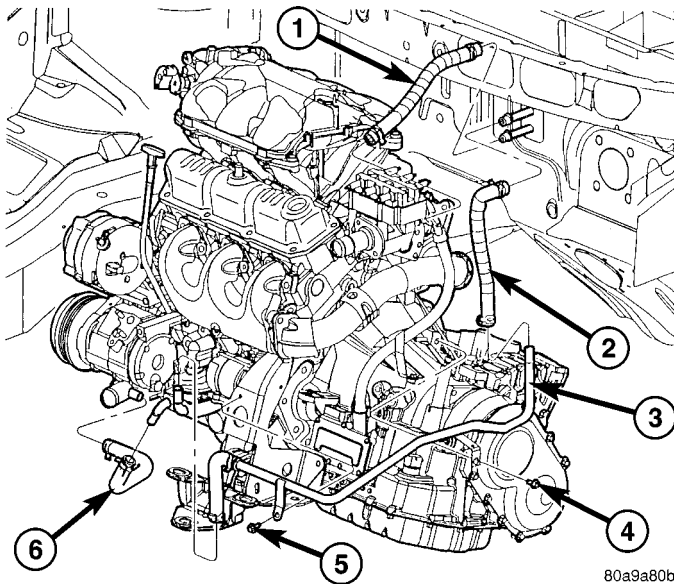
HEATER HOSES 3.3/3.8L (With Engine Oil Cooler)
